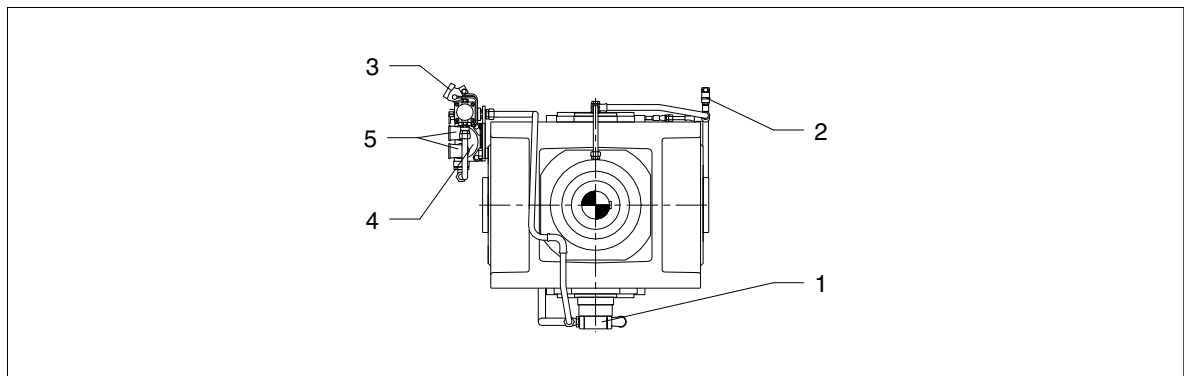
Water oil-cooling system on gear unit of type B3.V
